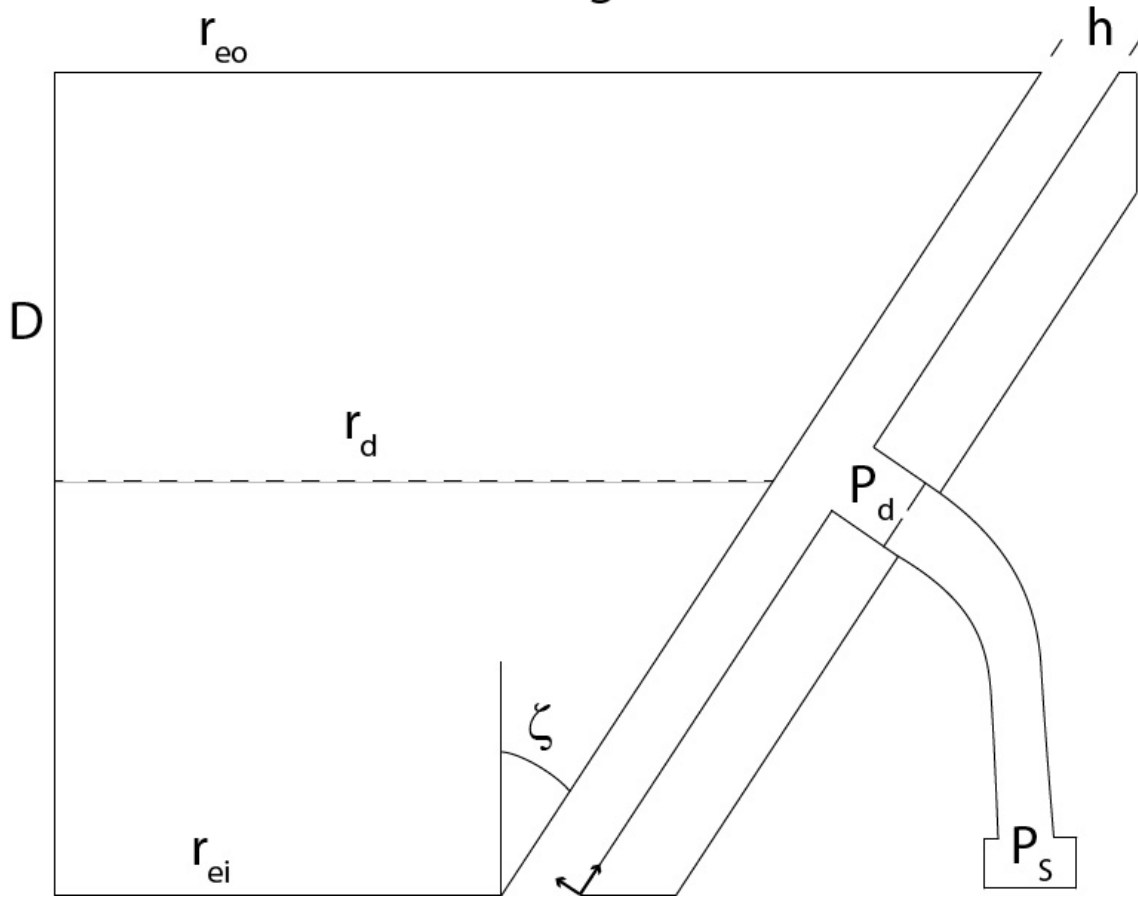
Cross-Section of the air bearing, cut in half at the rotation axis. We show only 1 side as the bearing is symmetrical.  $D$  is the total height of the bearing,  $r_{eo}$  is the radius of the top of the bearing,  $r_{ei}$  is the radius of bottom of the bearing,  $h$  is the height of the gap separating the bearing from the stator,  $\zeta$  is the angle of the bearing from the vertical,  $P_s$  is the pressure of the air source and  $r_d$  and  $P_d$  are the radius and pressure at the dispenser (the place where air enters the bearing).
